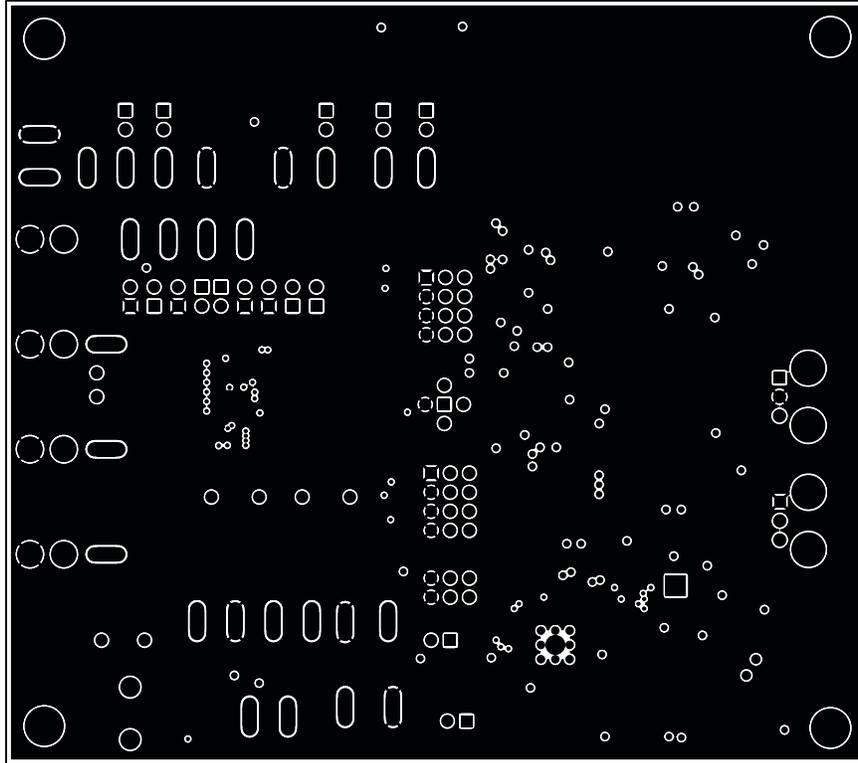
MAX9888 EV Kit PCB Layout—Power Layer 5
